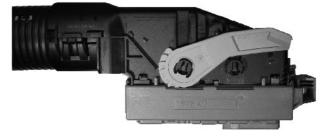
89-way module, locking slide and locking lever closed Abb. 59: Modul 89-polig, Verriegelungsschieber und –hebel geschlossen
